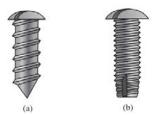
Self-tapping screws: (a) thread-forming and (b) thread-cutting
